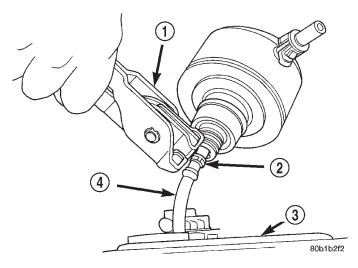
Tightening Fuel Filter Tube Clamp—TYPICAL
